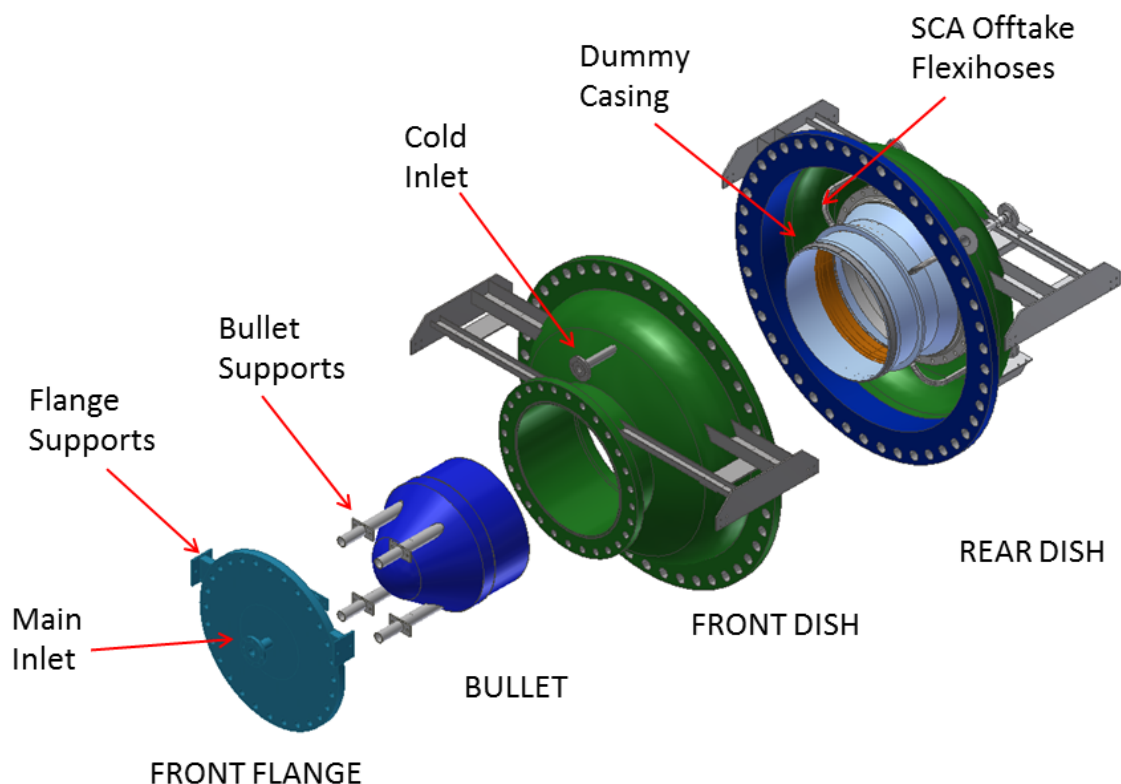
Exploded view of the vessel assembly. The bullet is bolted to the front flange. Each other section is supported on a rail system that allows each piece to move independently when unbolted.
